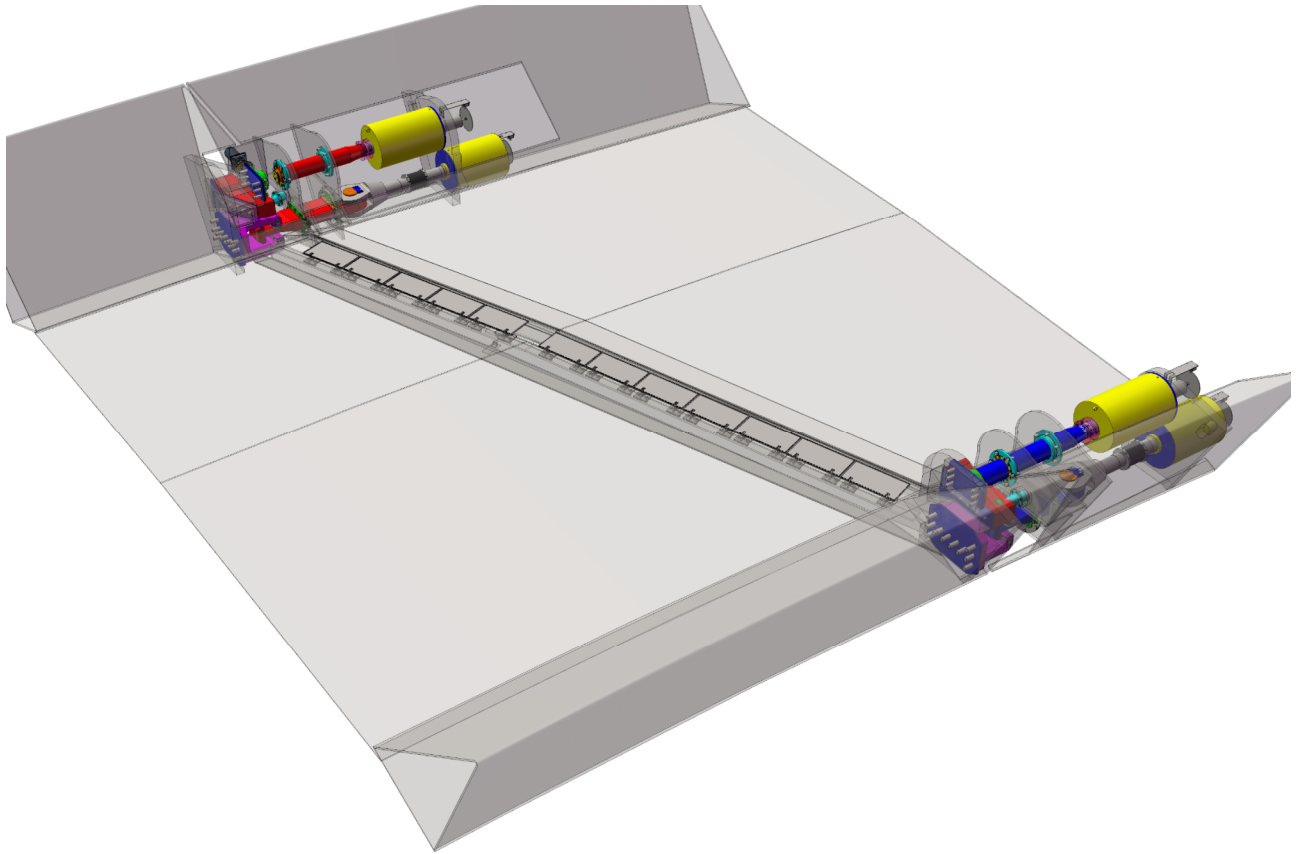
Assemblies installed within the deck beams. Source: Eadon Consulting
